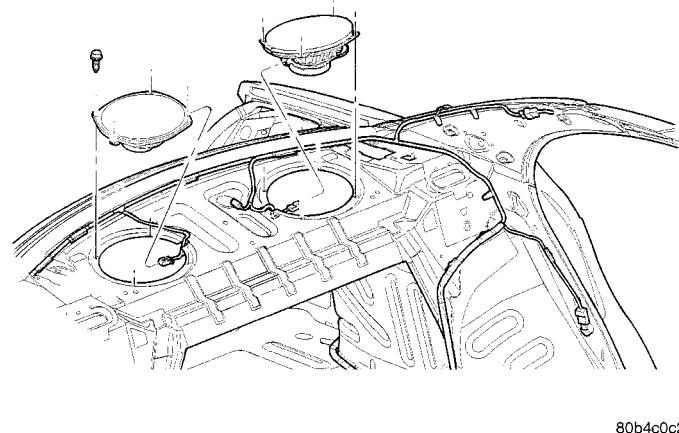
Rear Shelf Speaker(s) Remove/Install
